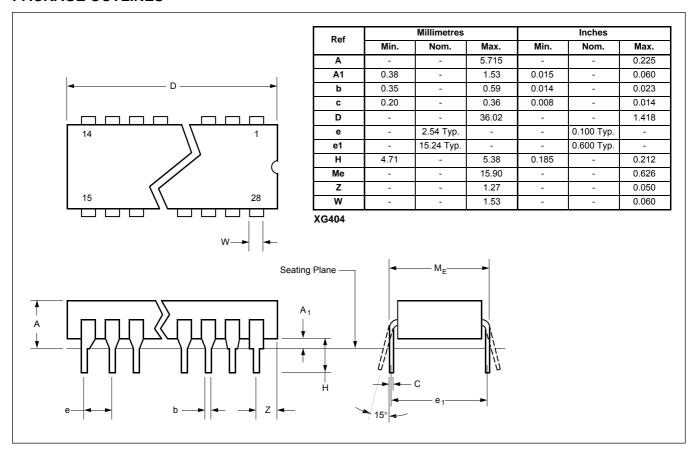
28-Lead Ceramic DIL (Solder Seal) - Package Style C
